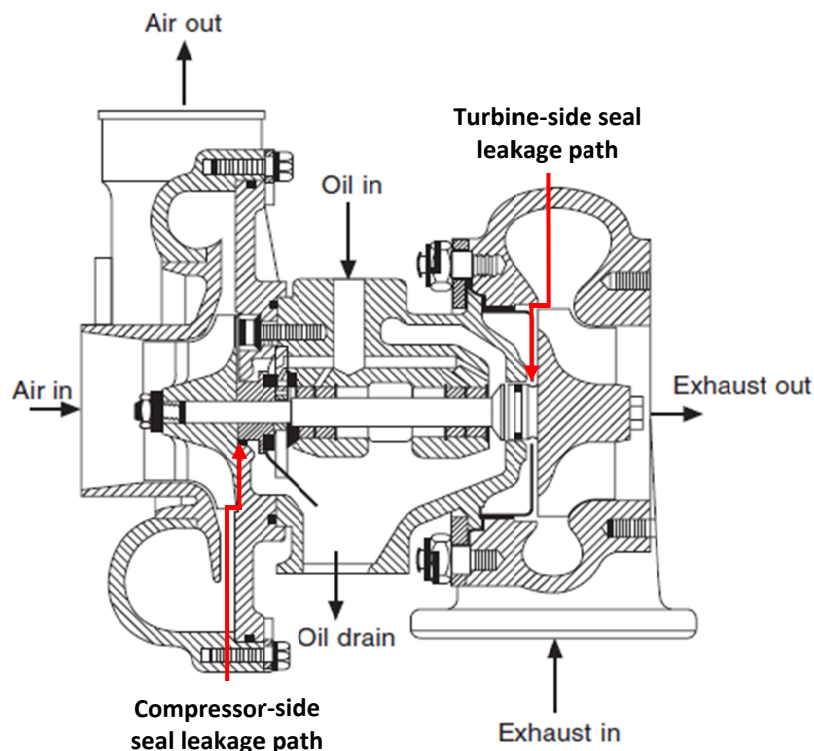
Turbocharger Cut-Away Drawing Reproduced from Garrett *et al* (2001)
